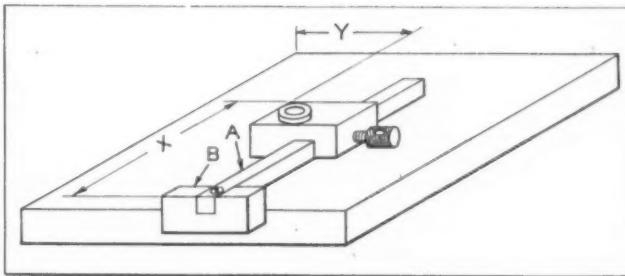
Drill Bushing Block for Locating Holes Accurately
